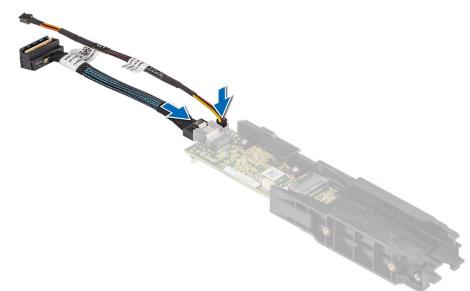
Connecting the BOSS power cable and BOSS Signal cable to the BOSS S2 controller card module
